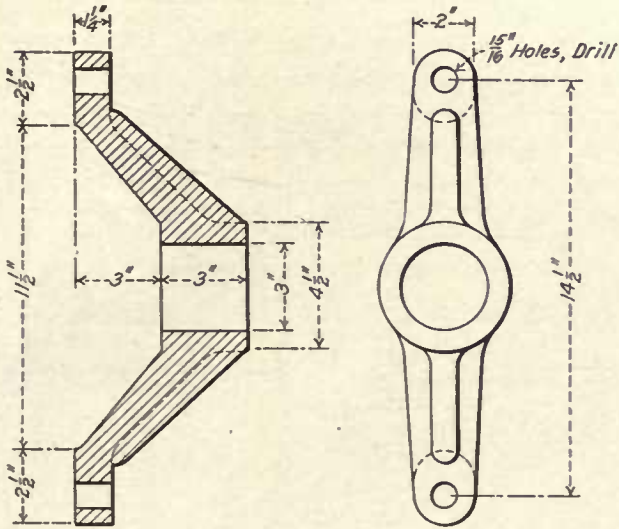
Guide Head for Boring Piston Valve Chambers.
